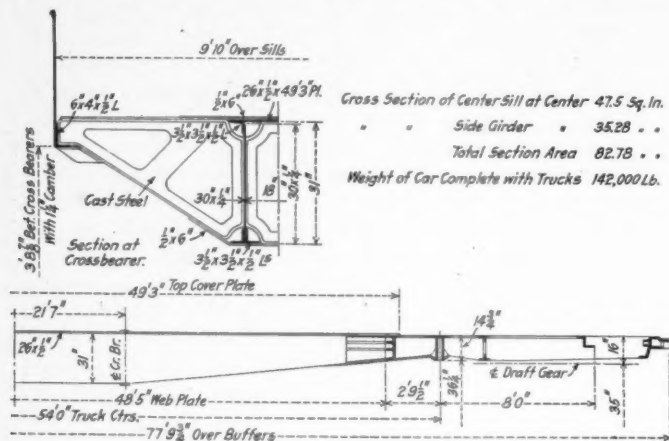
Underframe with Deep Center Sills and Light Side Girders
